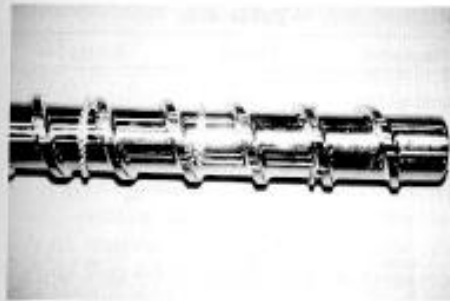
Maddock mixing device. (Courtesy Davis-Standard)
